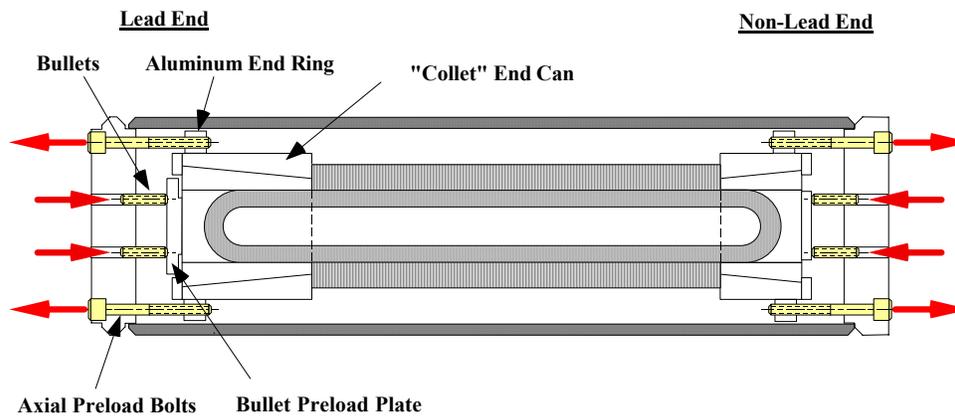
Axial Support of the Cold Mass Assembly
